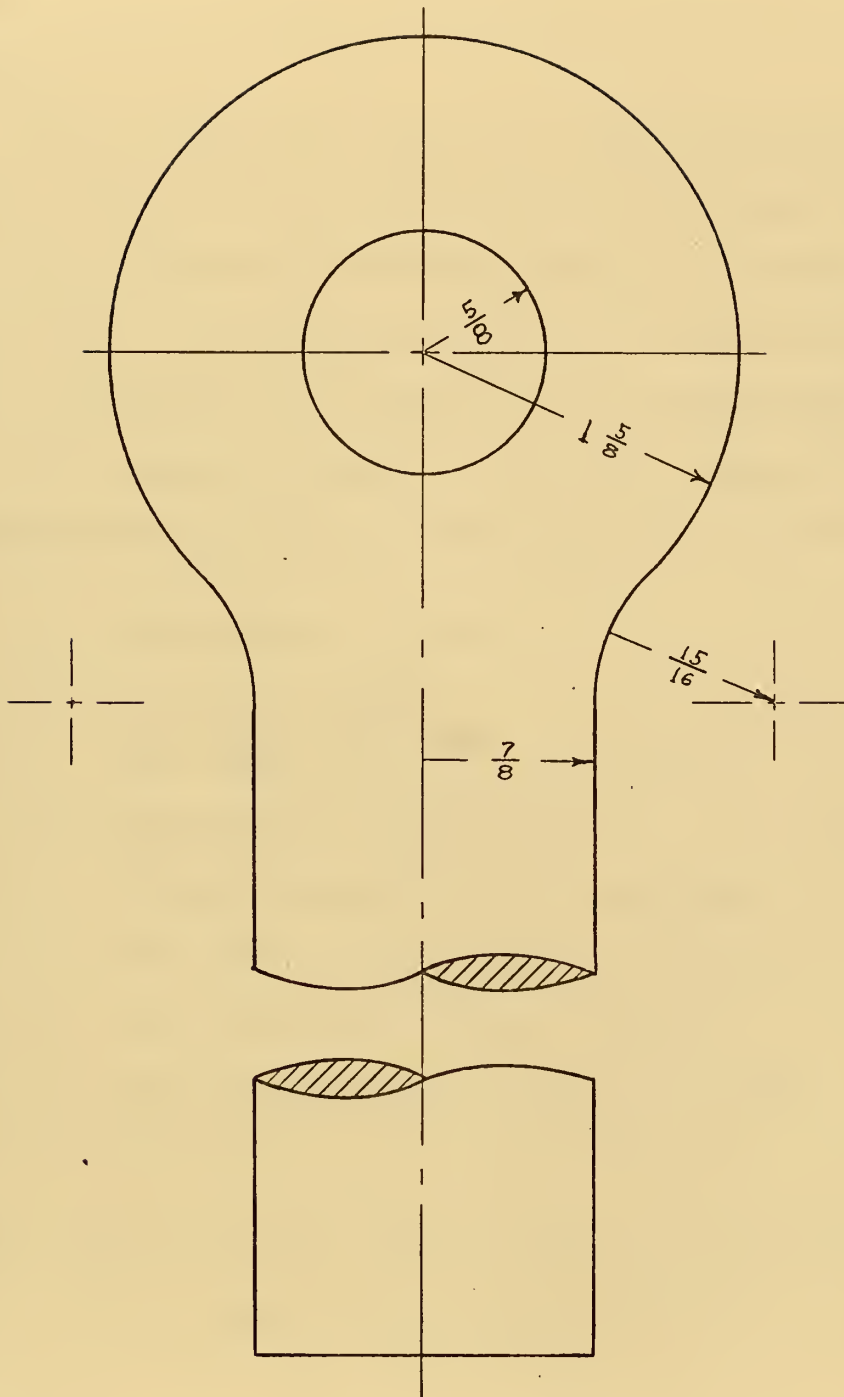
LOAD BEARING PORTION OF THERMIT WELDER
